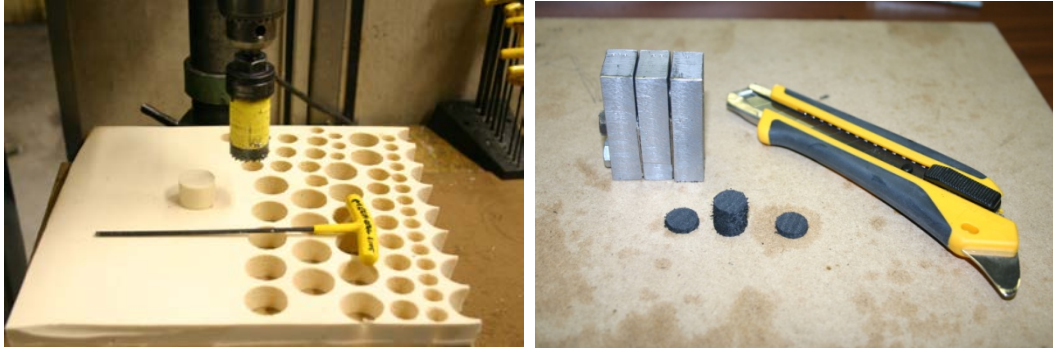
Sample coring from sheets [L] and custom fixture for cutting samples to length [R]
